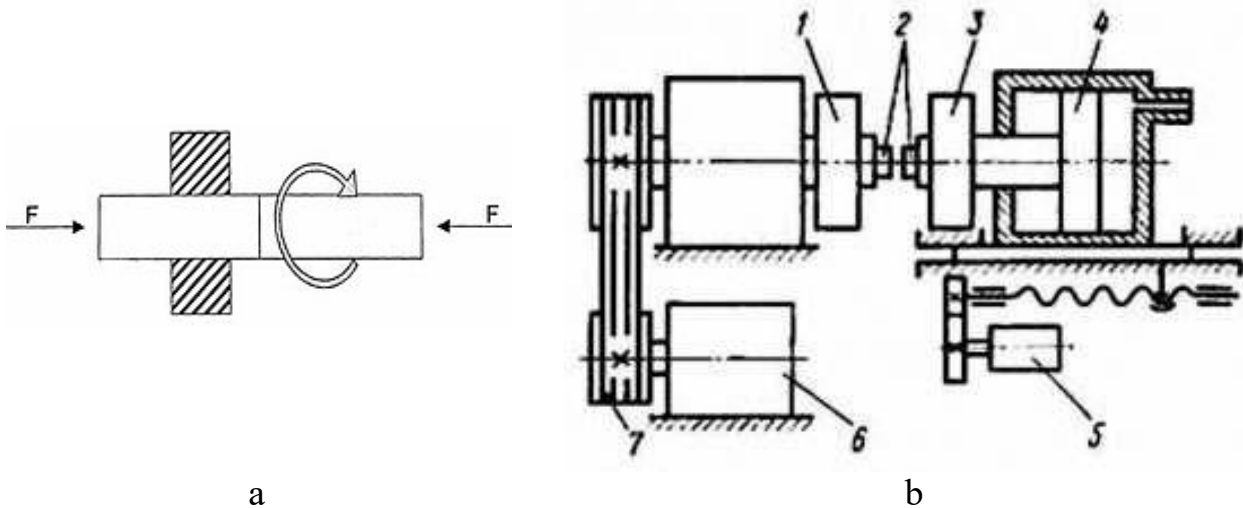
Scheme of the process (a) and equipment (b) of friction welding
